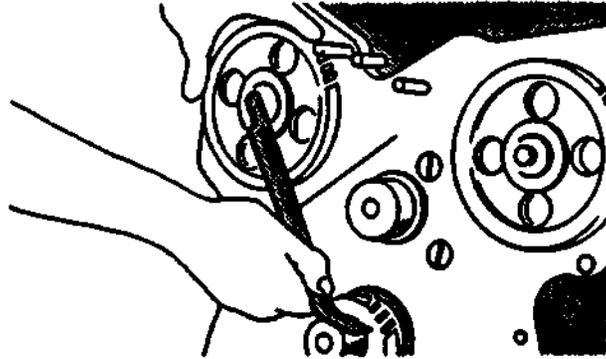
Aligning Timing Mark and Camshaft Gear
